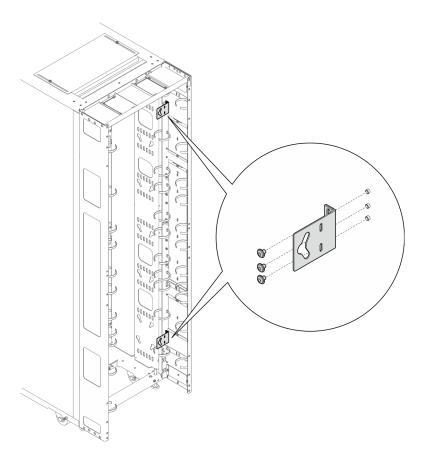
Installing the L-shaped bracket with the PDU facing the front of the rack cabinet
